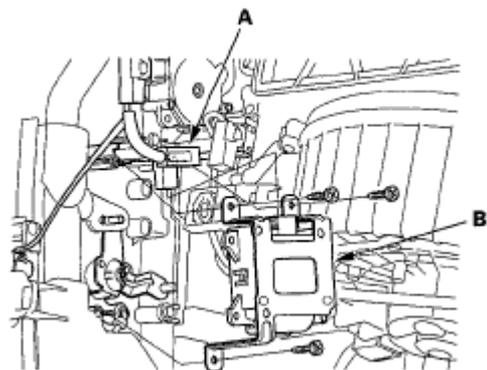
Identifying Passenger's Air Mix Control Motor And Fasteners
